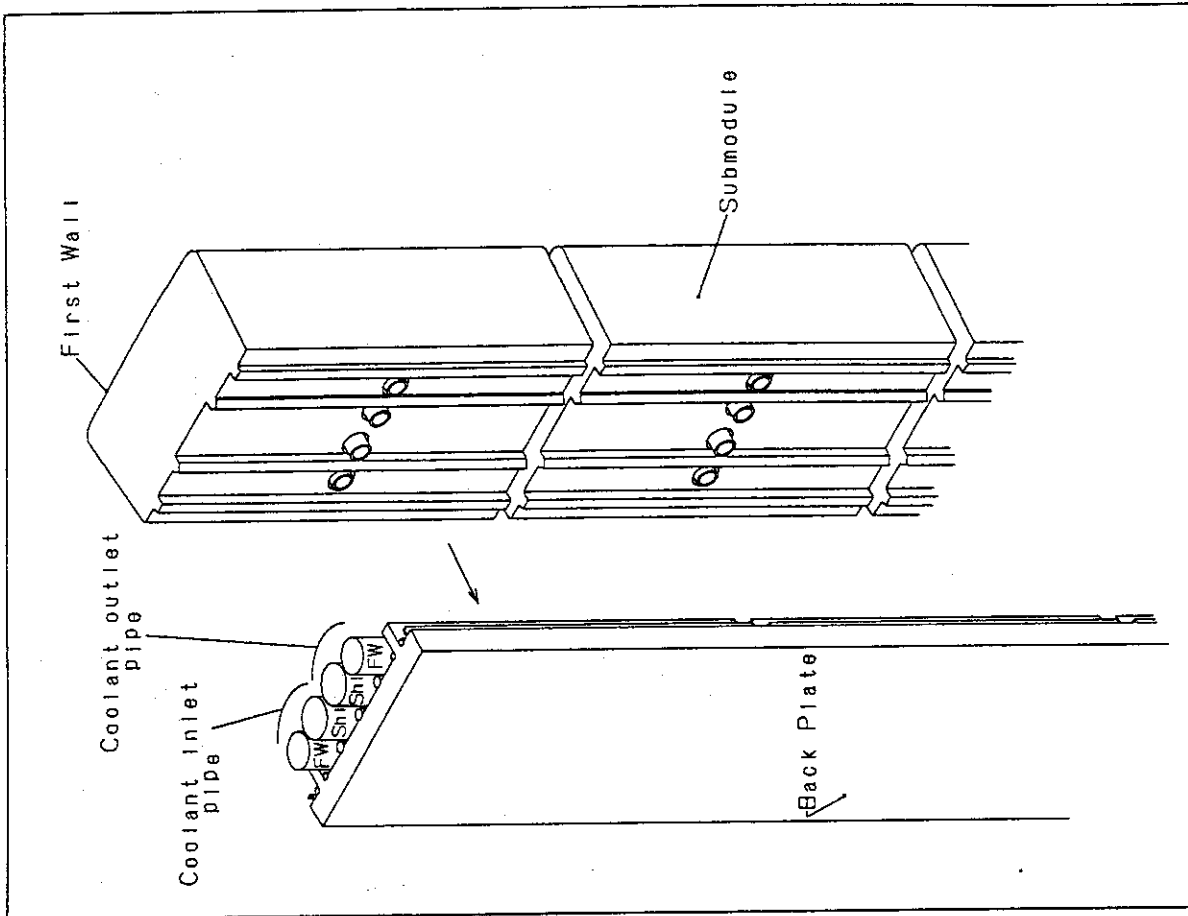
2 A bird's-eye view of the layered blanket sector
